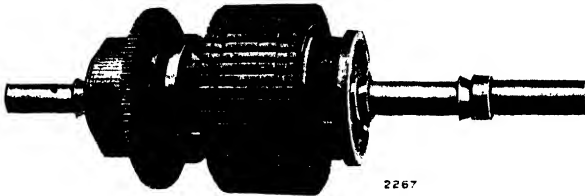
D.C. ARMATURE CORE READY FOR WINDING.
